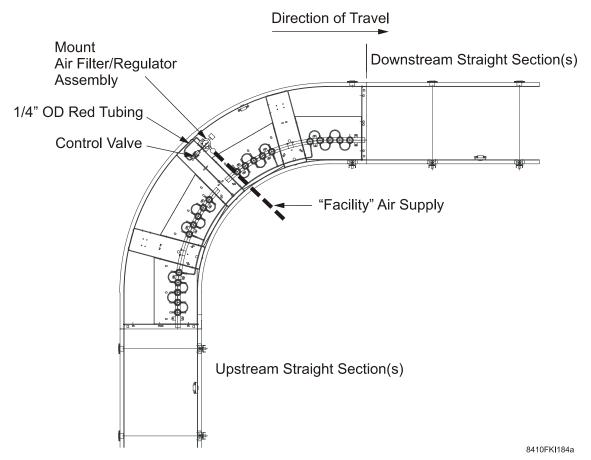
Mounting and Piping of Air Filter/Regulator Assembly
